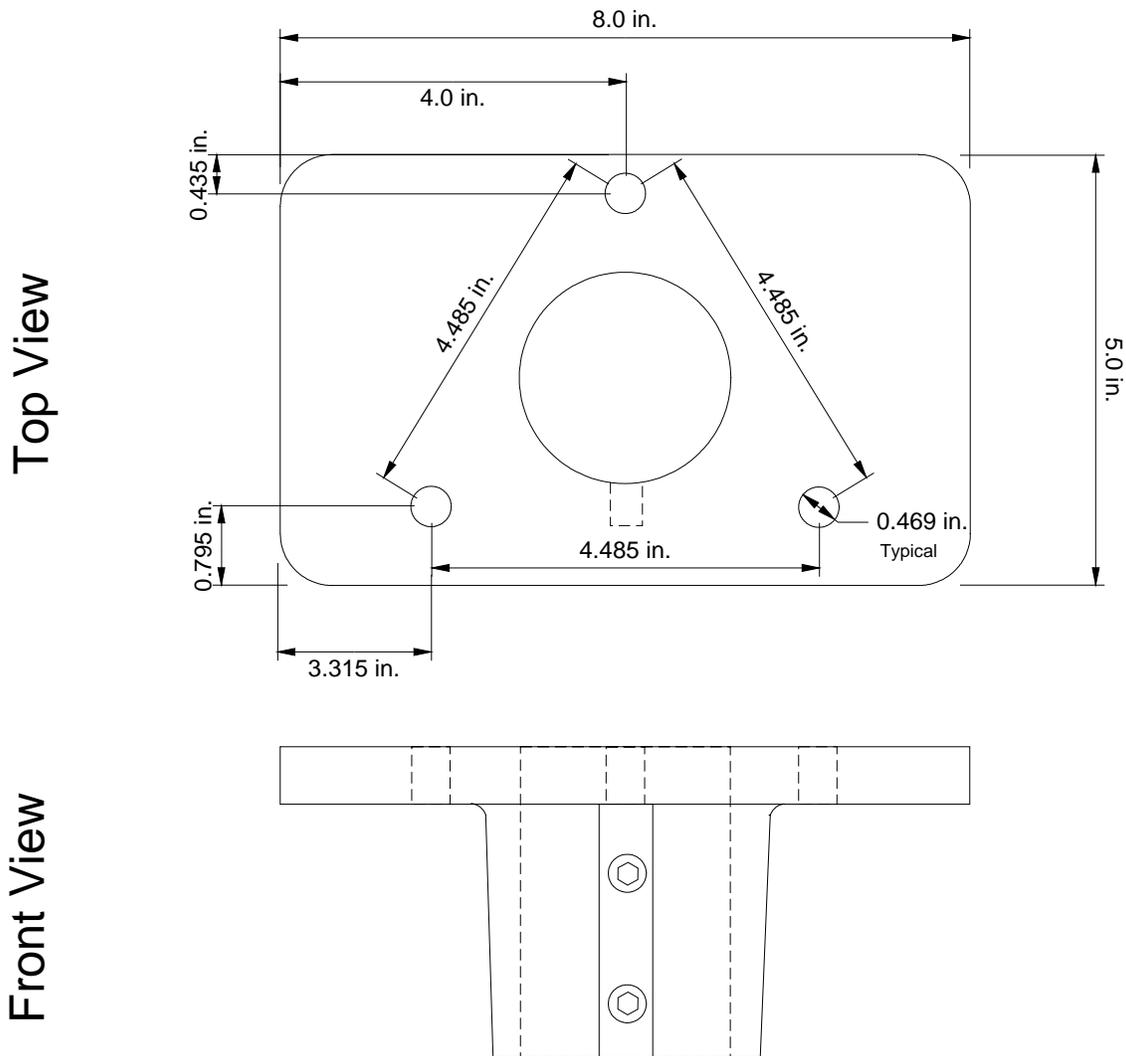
Drawing of the Hollaender base flange, with location of custom drilled holes depicted, on which the Geonor is mounted. The flange assembly is mounted at the top of the 2-inch diameter aluminum pipe, which is protruding from the concrete base.
